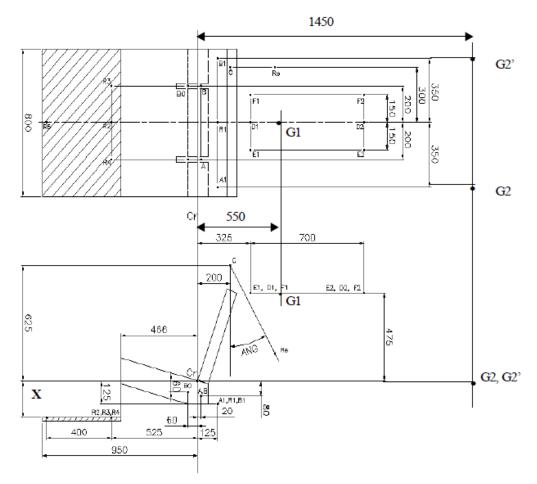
Technical Drawings Showing Anchorage Points [17]
